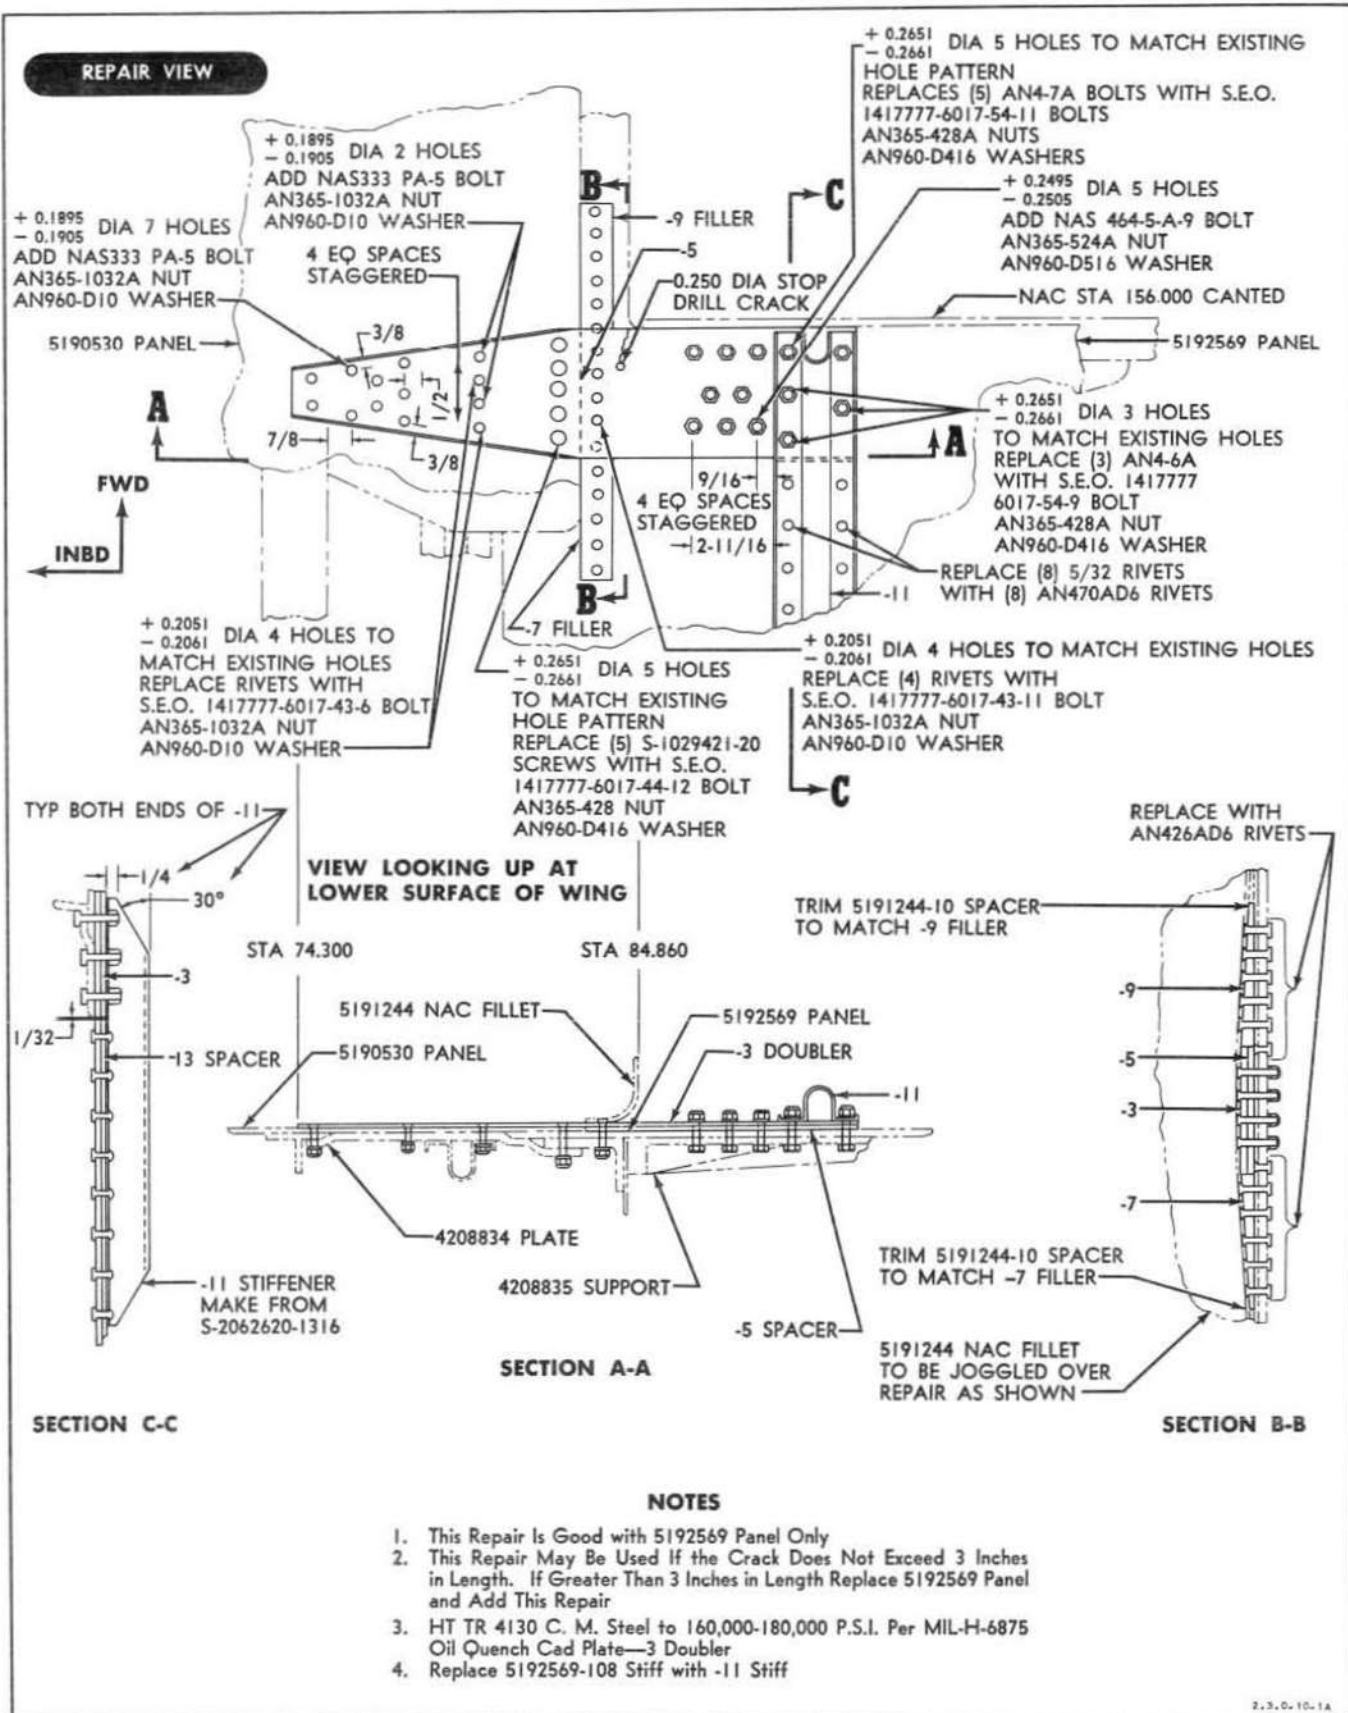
Repair of Chordwise Crack in Lower Wing Skin Panel, Part No. 5192569 (Sheet 1 of 2)
